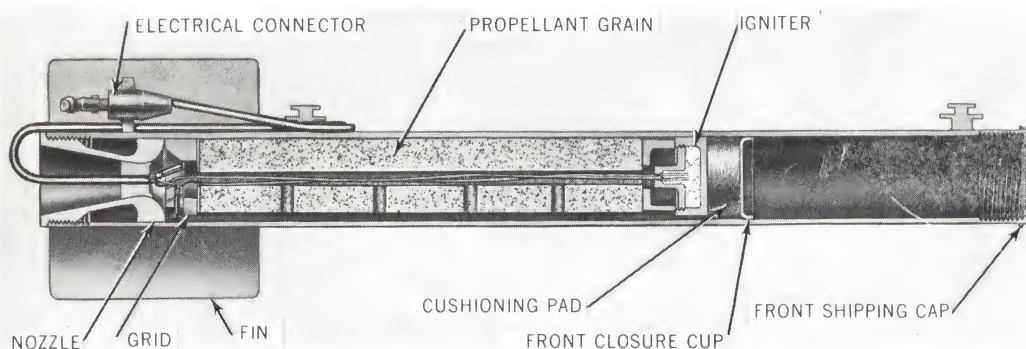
2.25-Inch Rocket Motor Mk 16 Mod 6, Cross Section.
